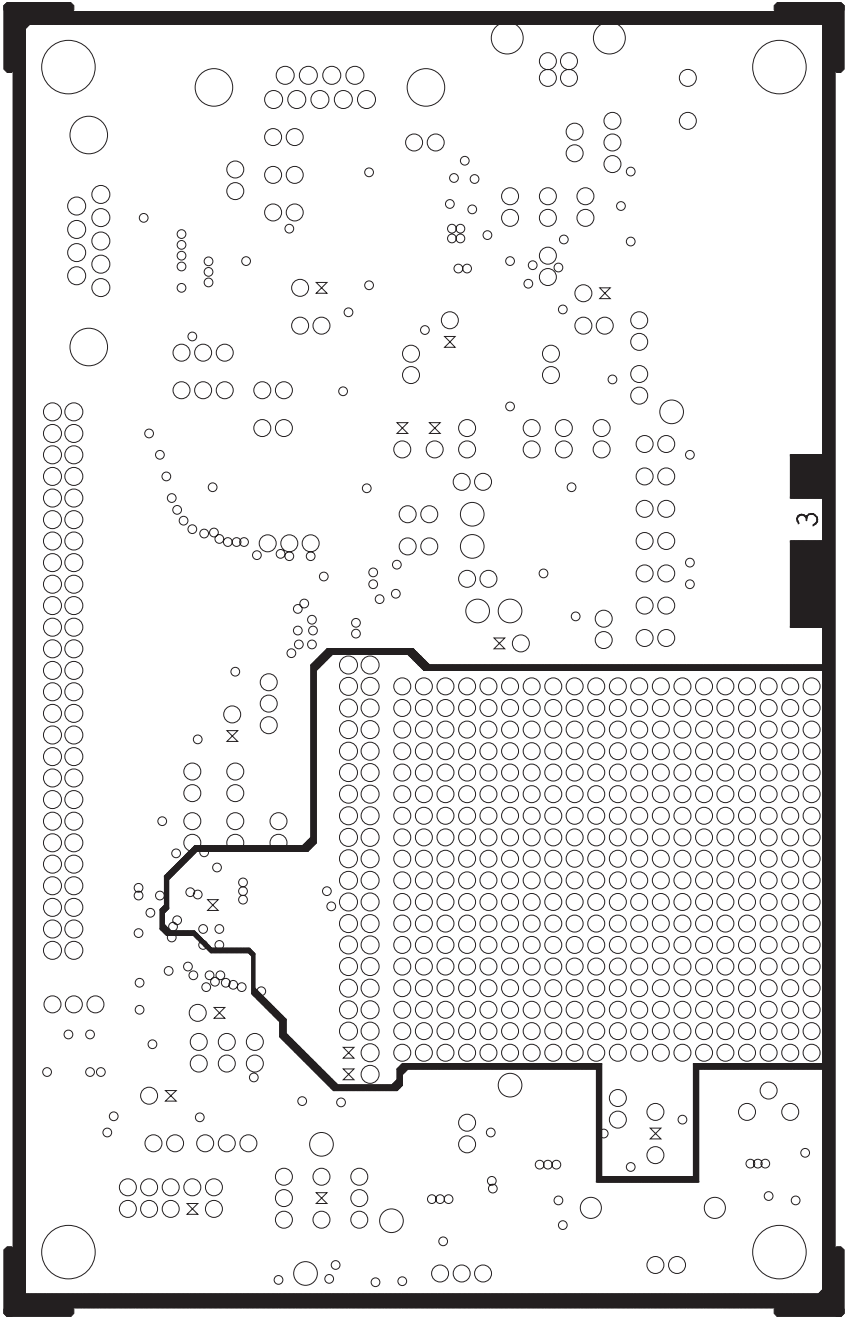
MAX1358 Evaluation Kit PCB Layout—VCC Layer 3
